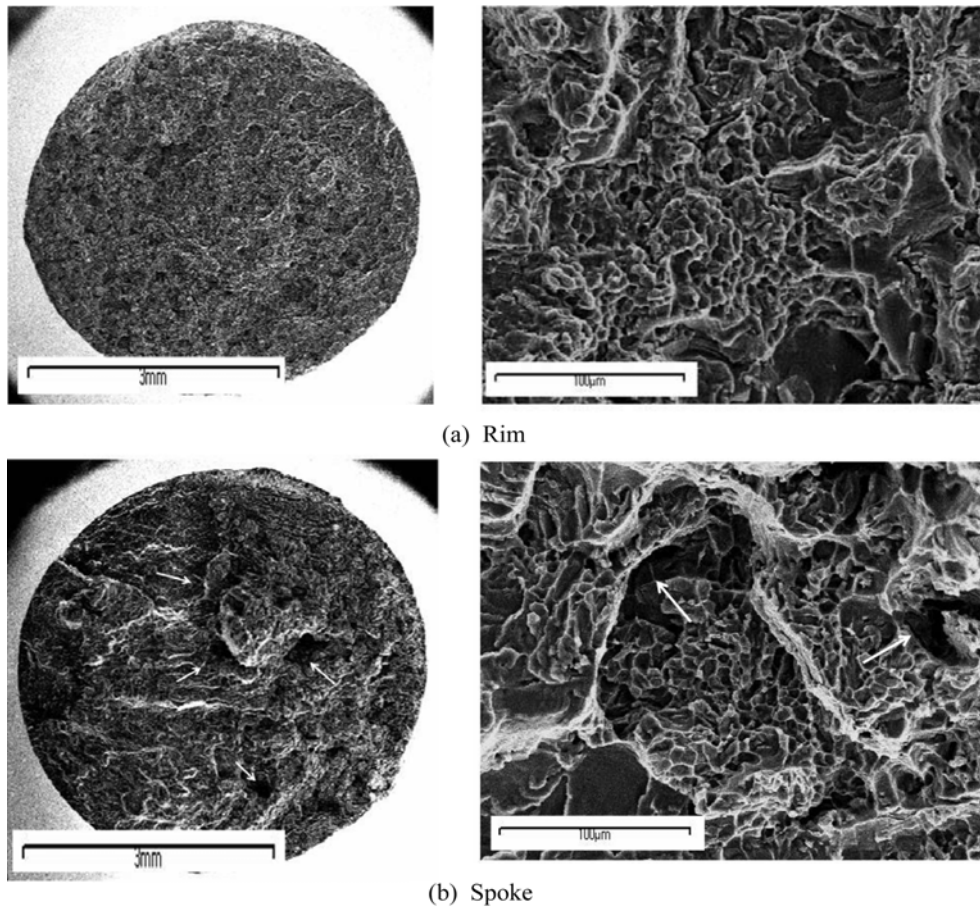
Scanning electron fractographs of broken LCF test specimens of (a) rim, (b) spoke part of Al-alloy wheel.
